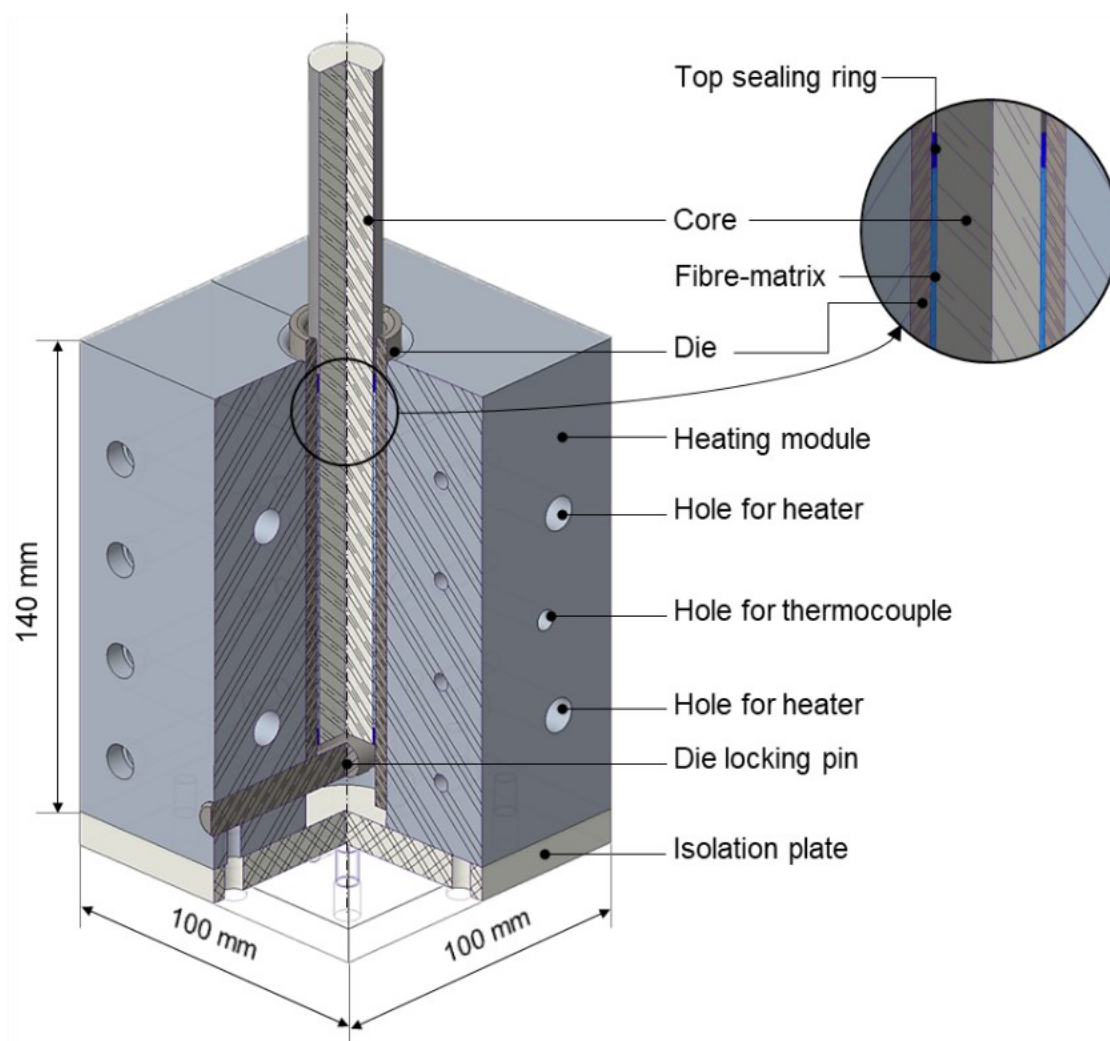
Heating module assembly offset-section showing the die and core arrangement within the heating module and magnification showing fibre-matrix between the die and core.
